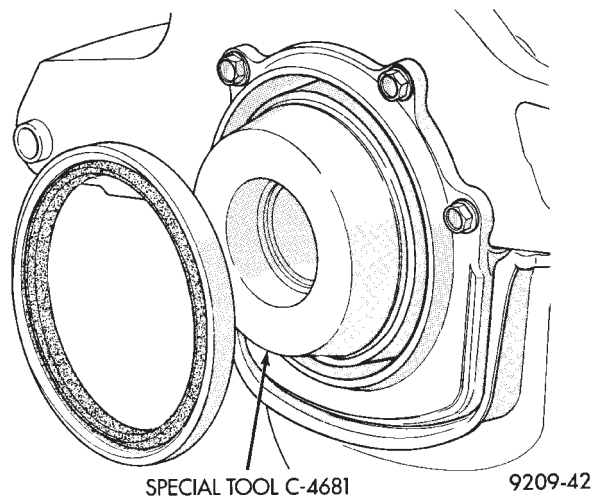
Removing Rear Crankshaft Oil Seal
